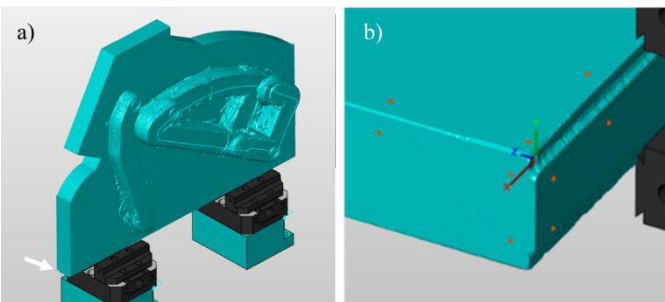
a) The corner of the part was probed to establish the coordinate system and b) closeup of the probing points (orange) and the reconstructed machine tool coordinate system used in Hypermill.
